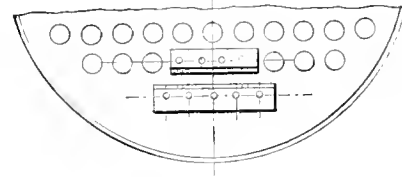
DETAIL OF BRACING ON LOWER PART OF BACK HEAD.
